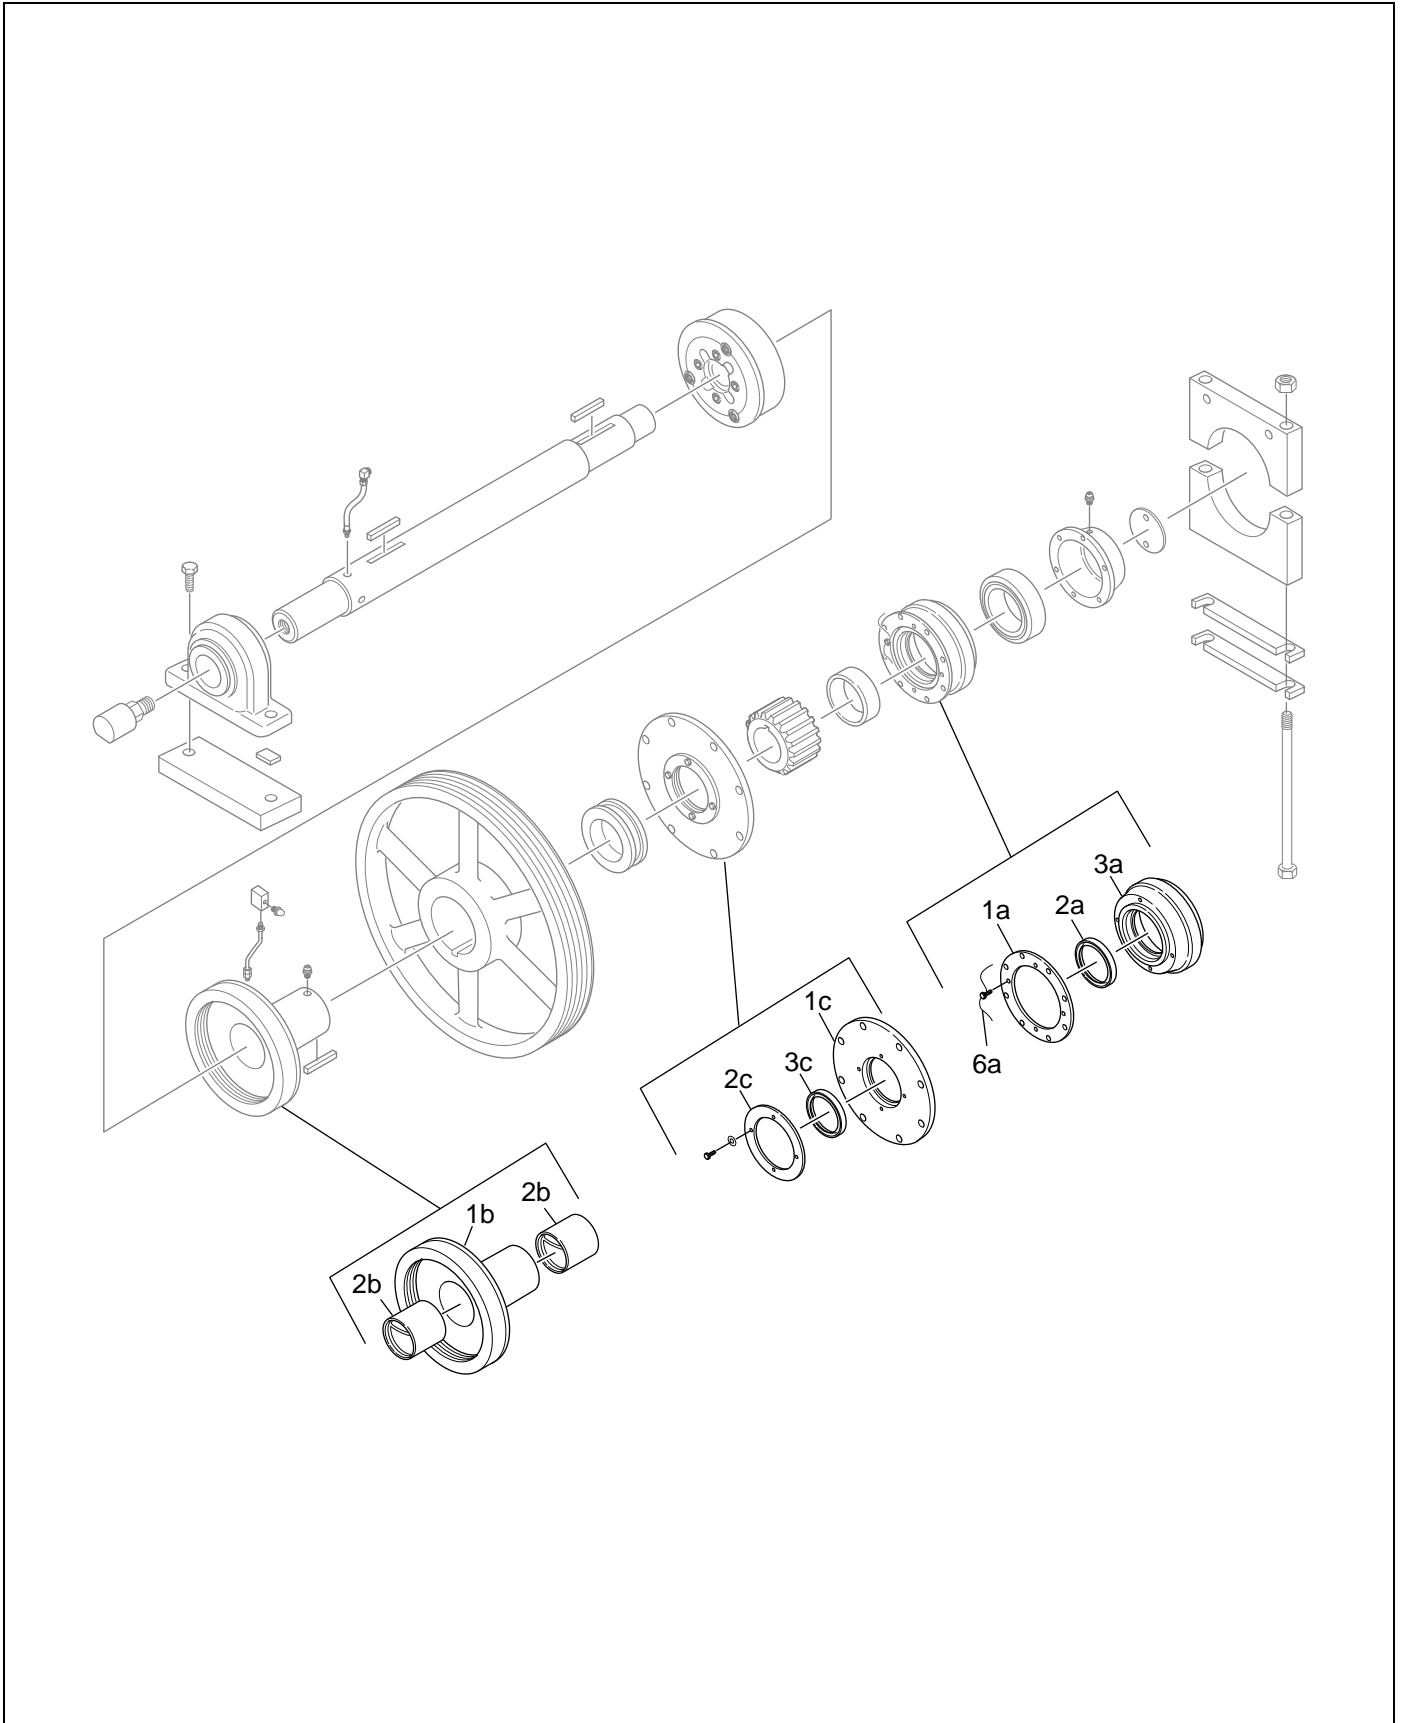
Housing Subassembly – Hyatt, Sleeve Subassembly – Clutch, Oil Retainer Subassembly – Drive Shaft (#220713, #461410 and #345641)
